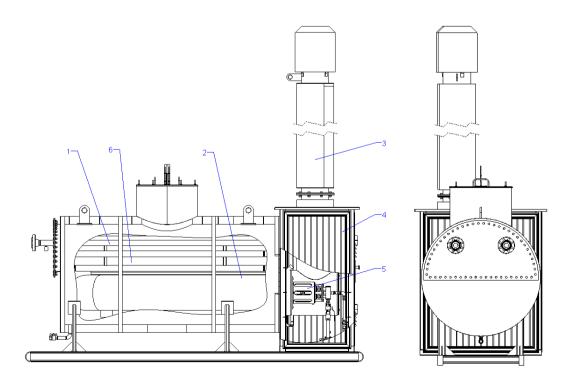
WTG 634 main components 1 – coil; 2 – firetube; 3 – stack; 4 – cabinet; 5 – burner;
